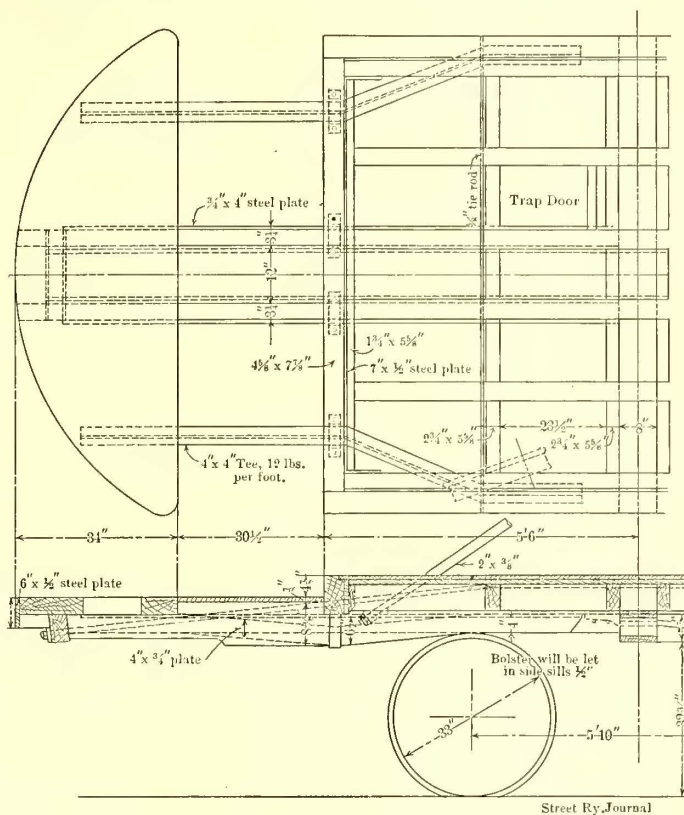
STANDARD PLATFORM FRAMING OF THE JEWETT CAR CO. BOTH STIRRUPS AND STRAPS ARE COMMON FORMS OF CONSTRUCTION FOR HOLDING TIMBERS
